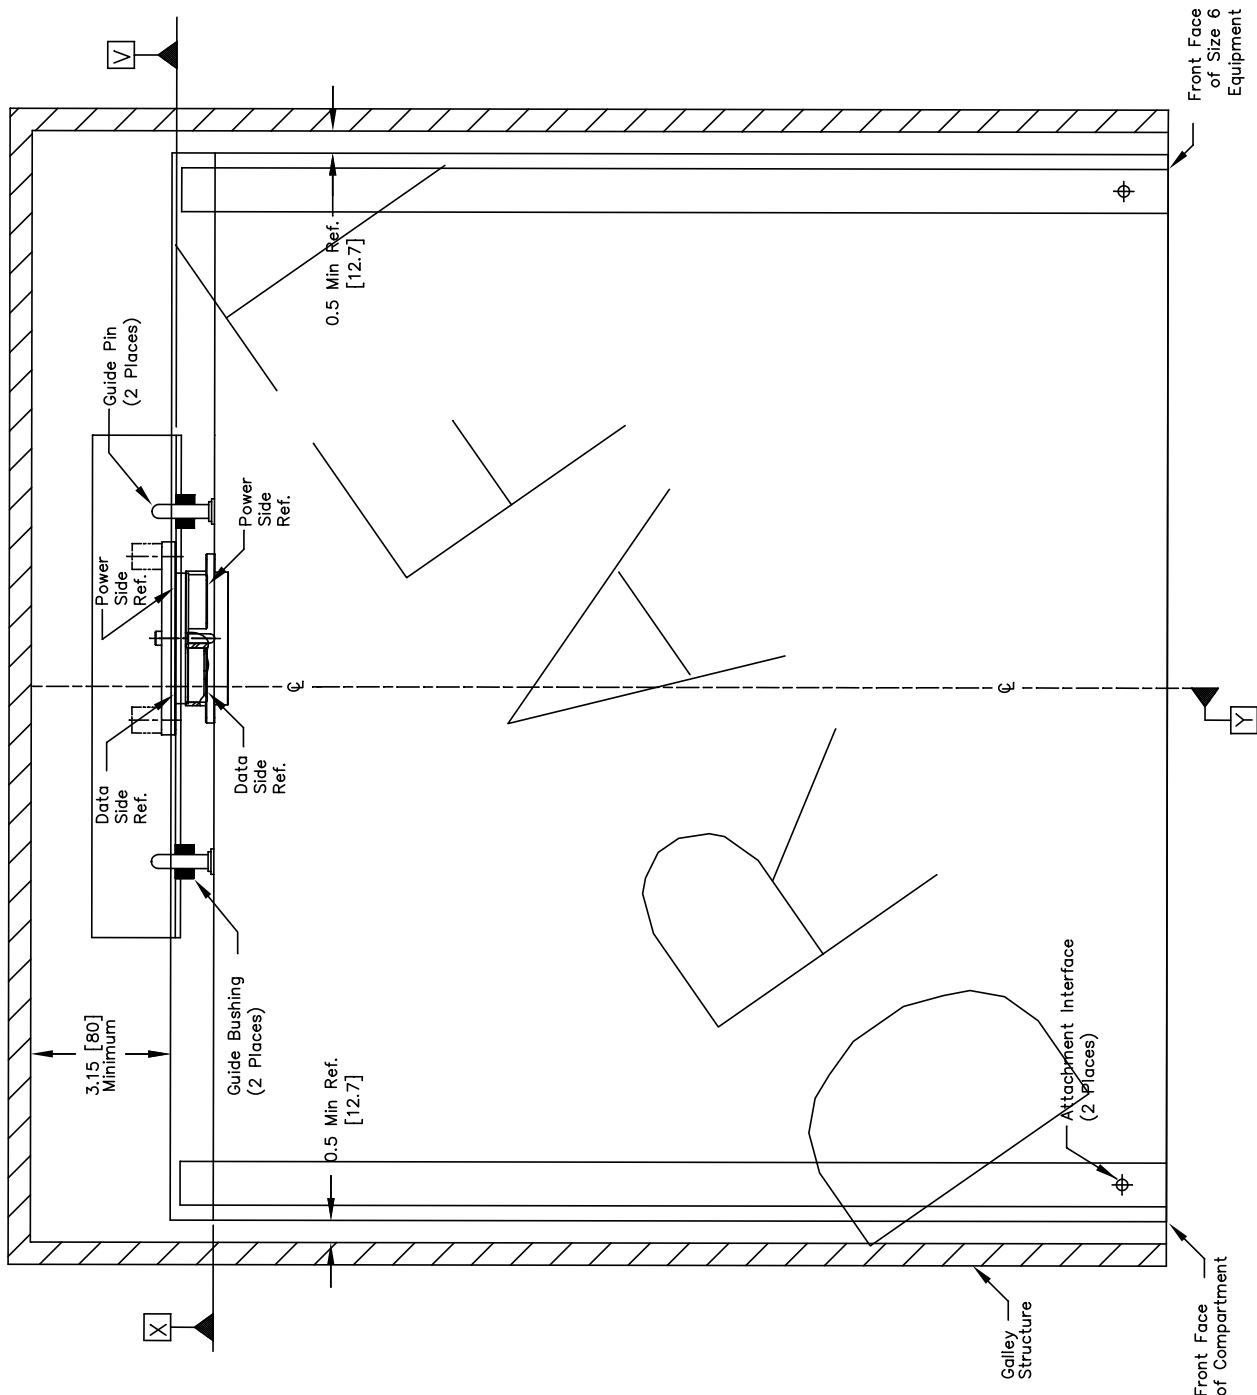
C - GAIN Size 6 Compartment and Equipment installation details
